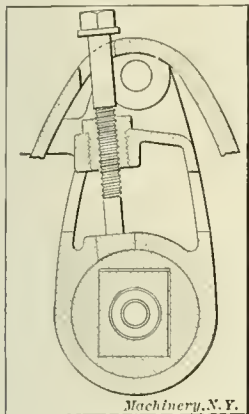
Set-screw with Shoe for Clamping Sleeve
